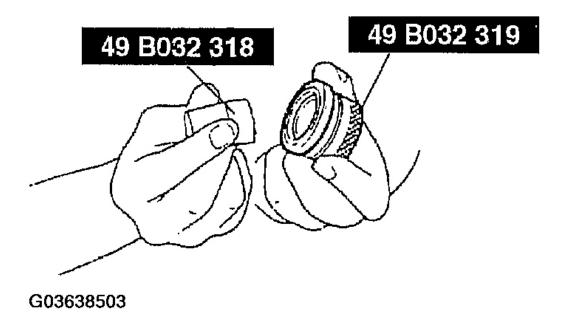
Installing New Oil Seal And Inner Guide To SST Courtesy of MAZDA MOTORS CORP.
